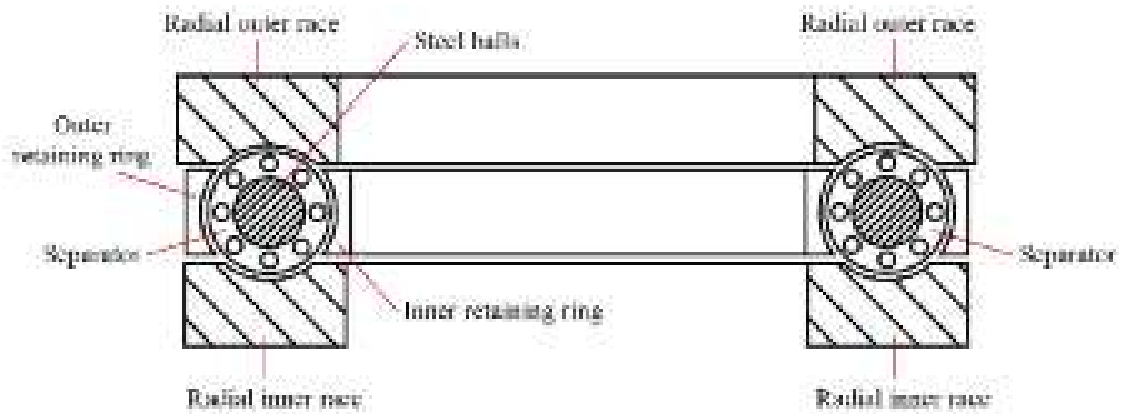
A sectional side view of a blade bearing illustrating the small gap between the bearing inner and outer ball retaining rings, radially inner and outer raceways that assists in retaining grease within the bearing.
